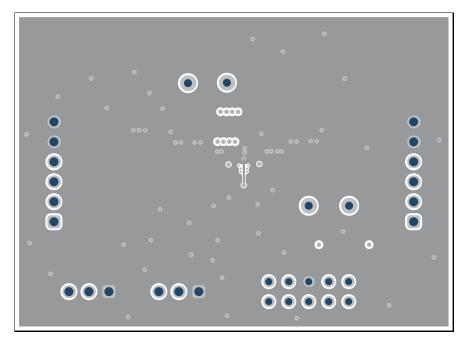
TPS6381xEVM PCB - Signal Layer 2 (Top View)
